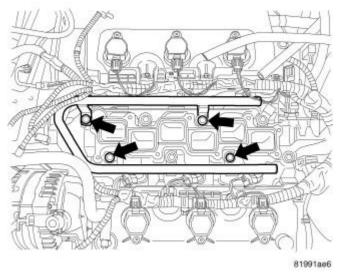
Identifying Fuel Rail Bolts Courtesy of CHRYSLER LLC
